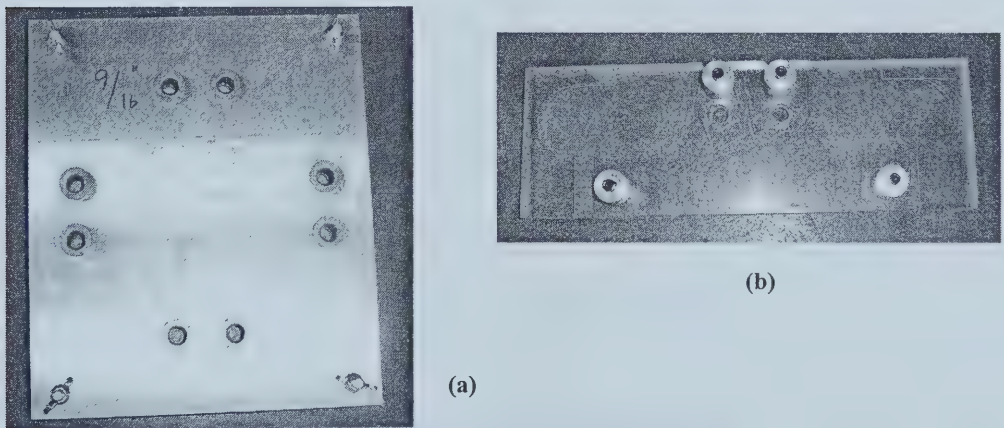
(a) Drilling jig, and (b) milling jig for cruciform specimen.
